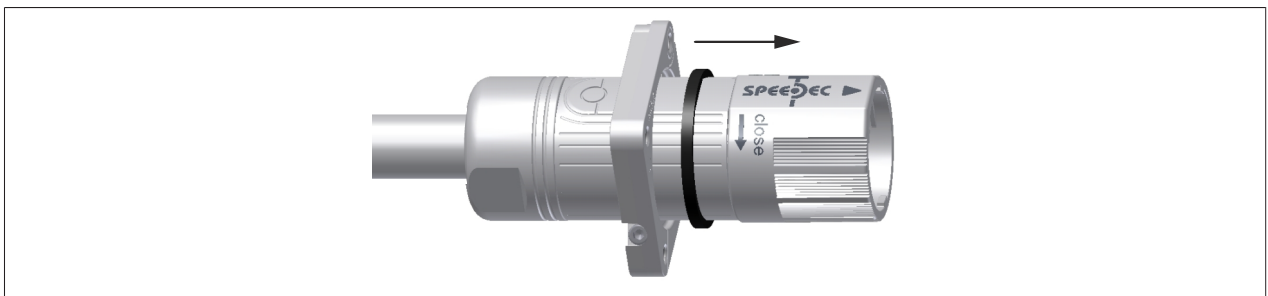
Attaching the metal flange to the connector (rear panel installation)
